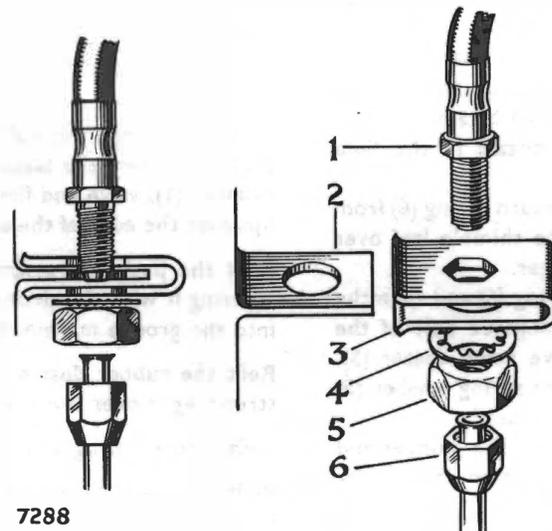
Flexible hose connection - In some instances the locating plate (3) is omitted.
